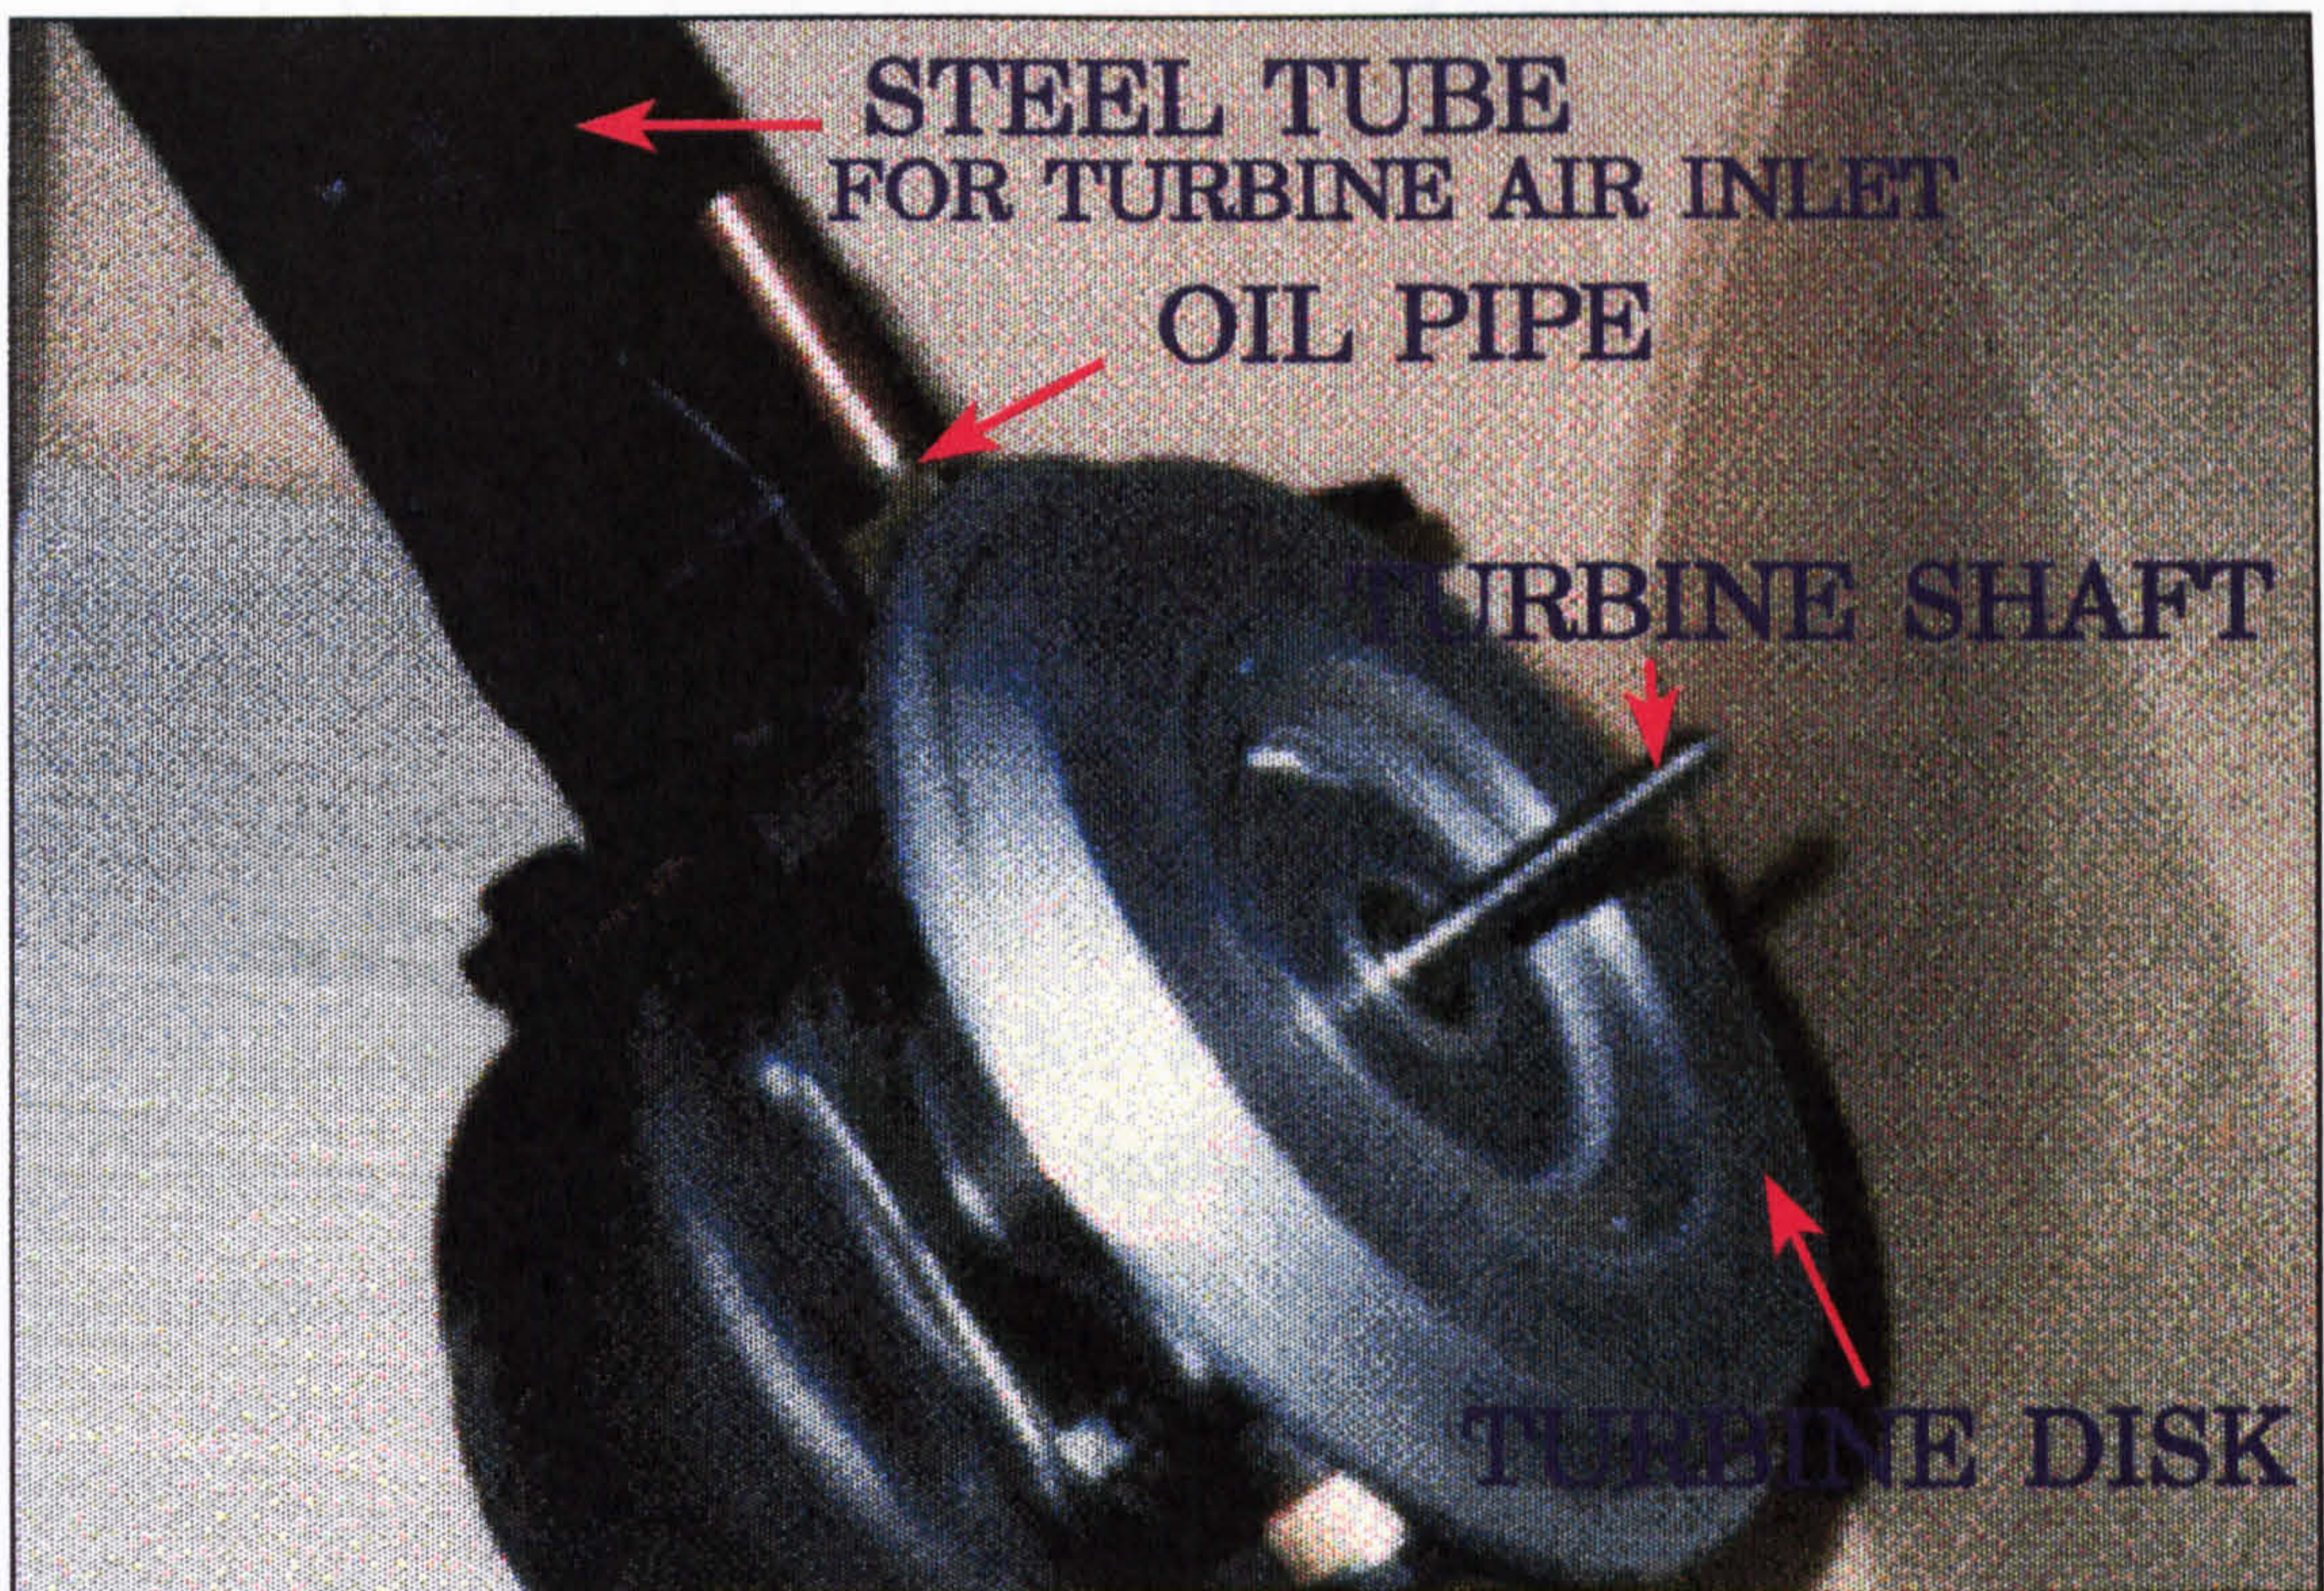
(b): Photo-1 showing the Air Turbine before assembly.
